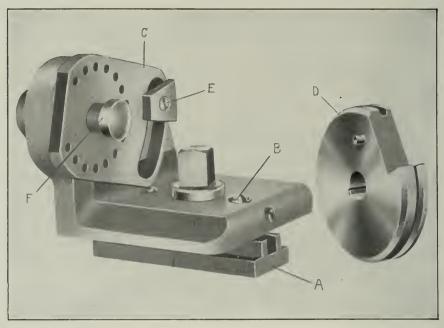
Adjustable Tool Post for Circular Forming Tools
